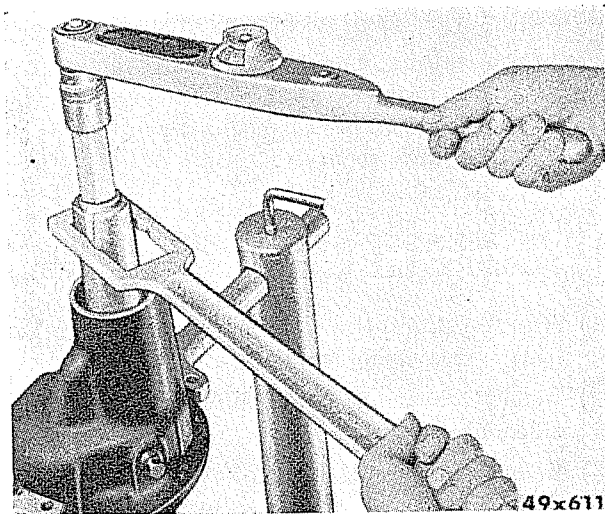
Tightening Compression Nut with Foot—Pound Torque Wrench.
